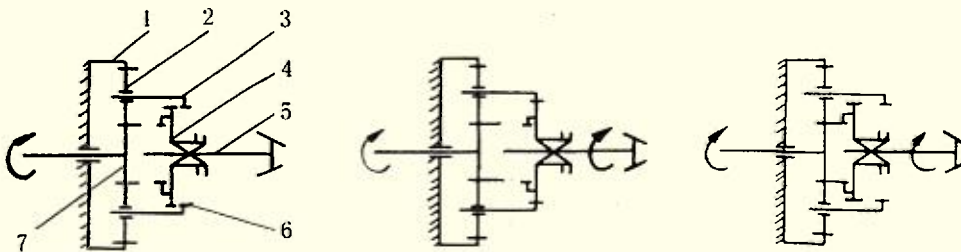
10 Planetary gear mechanism of auxiliary gearbox
